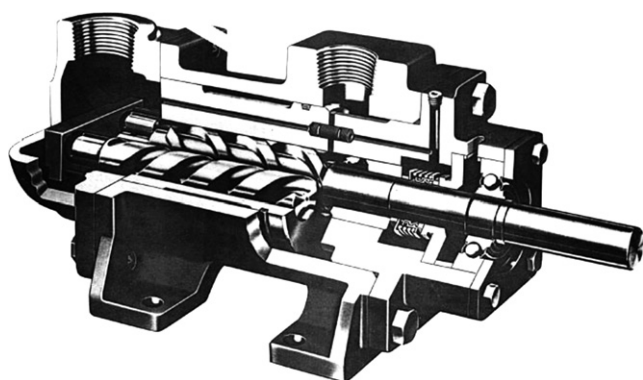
• Screw pump (Courtesy of IMO Industries)
